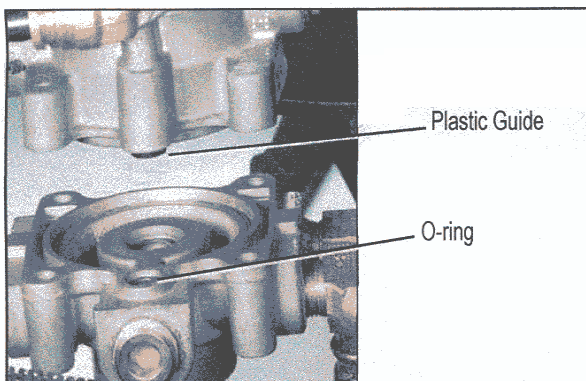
PLASTIC GUIDE AND O-RING SEAL
